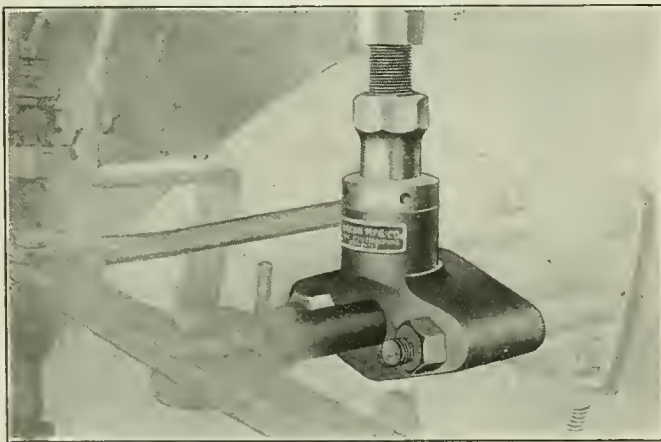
Throttle Rod Stuffing Box in Position on Boiler Head
